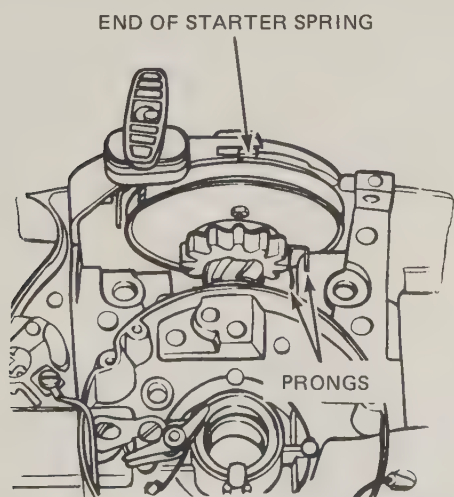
Proper position of the end of the starter spring. (Evinrude Motors Division of Outboard Marine Corporation)
